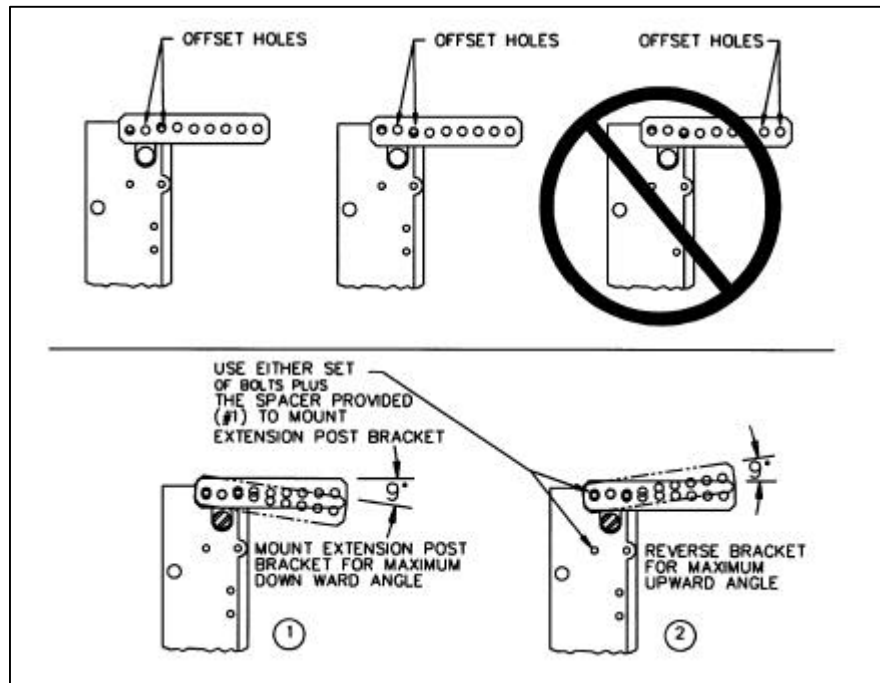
EXTENSION BRACKET MOUNTING
